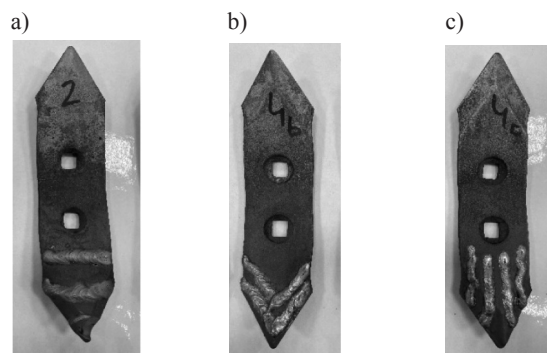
Types of padding welds: a) strip arrangement perpendicular to the abrasive stream, b) V-shaped arrangement, c) strip arrangement in a direction parallel to the abrasive stream
